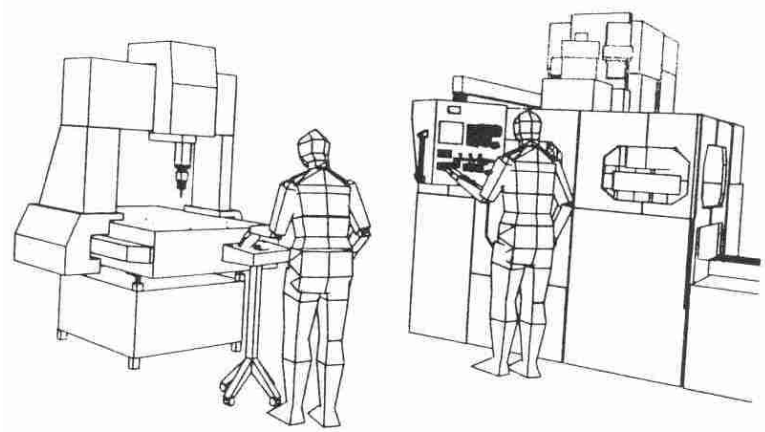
Machine shop showing a Wadkin Machining Centre and a Co-ordinate Measuring Machine (CMM)
